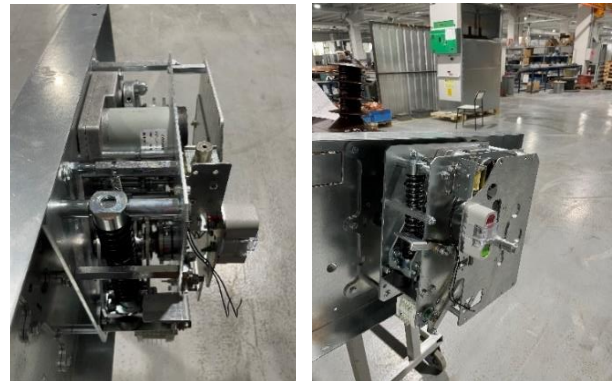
Latest design of motorized single-shaft three-position disconnecter mechanism
